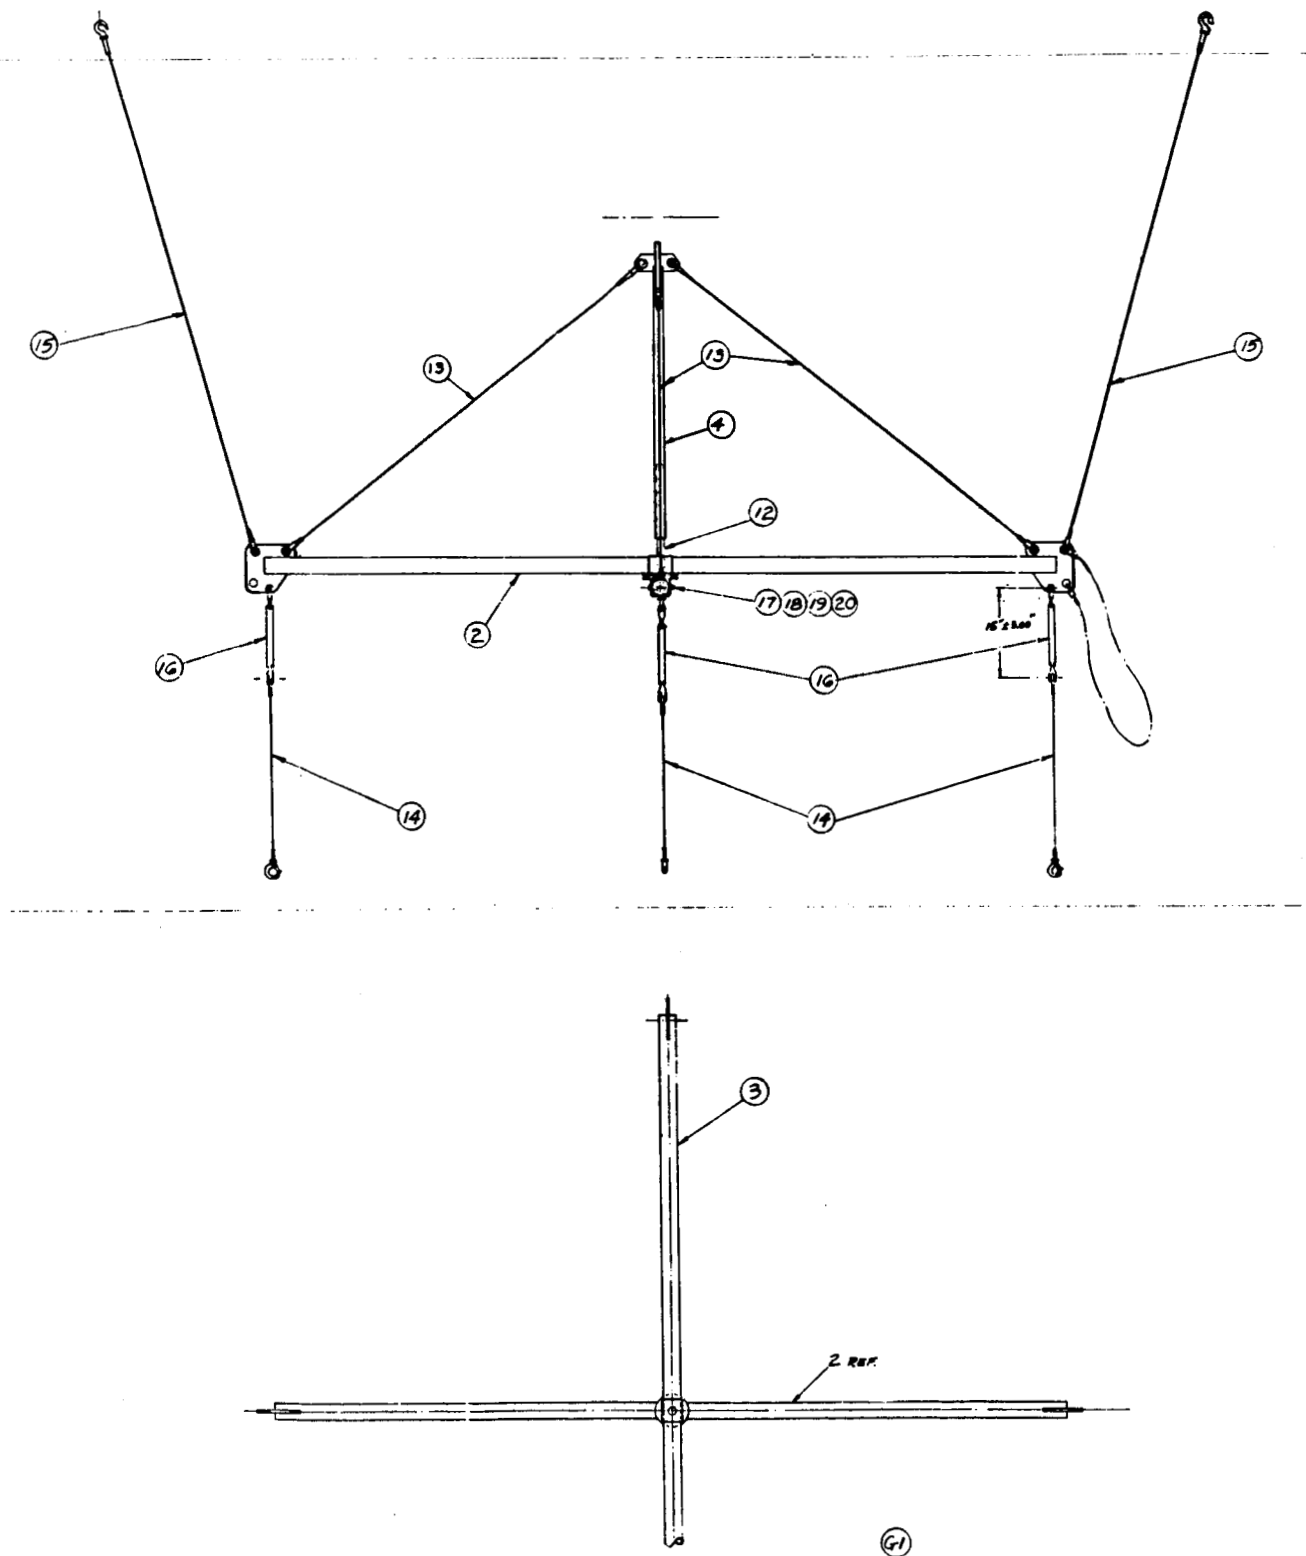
Lift Sling (GE Drawing 47E211780)
